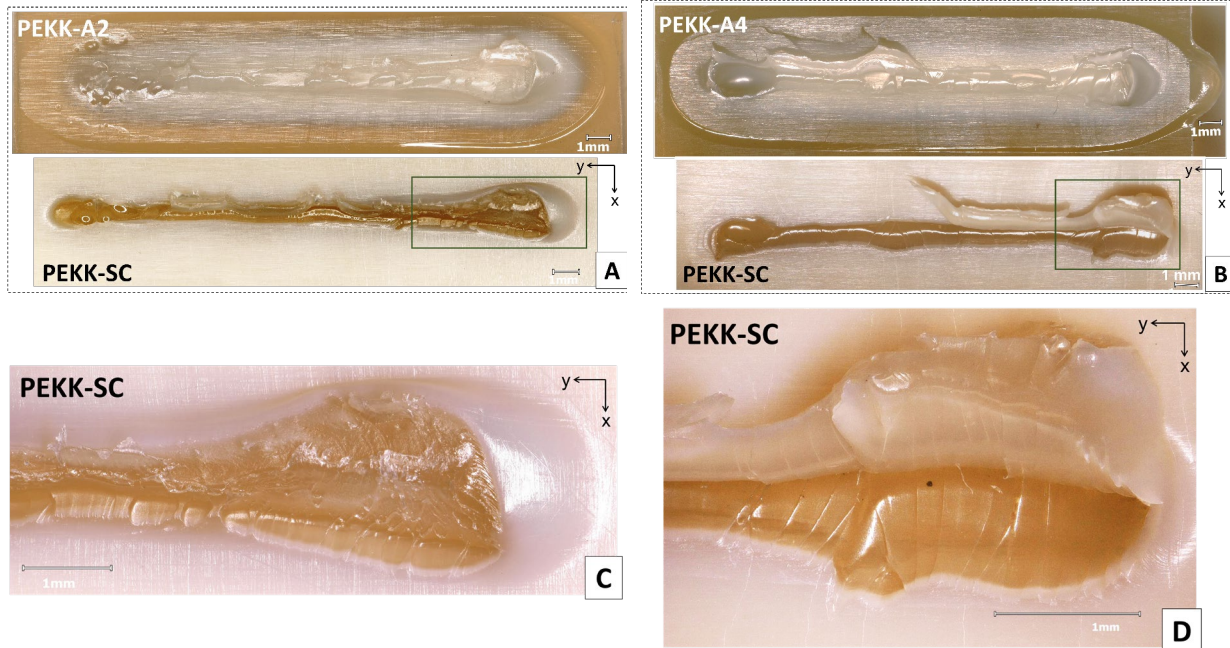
Weld bond of assemblies failed with cohesive mode. The opened overlapped interfaces allow to visualize the weld bond on each substrate of the assembly for (A) A2/SC-P2 and (B) A4/SC-P2. (C) Magnified view of inset show in (A). (D) Magnified view of inset shown in (B).
